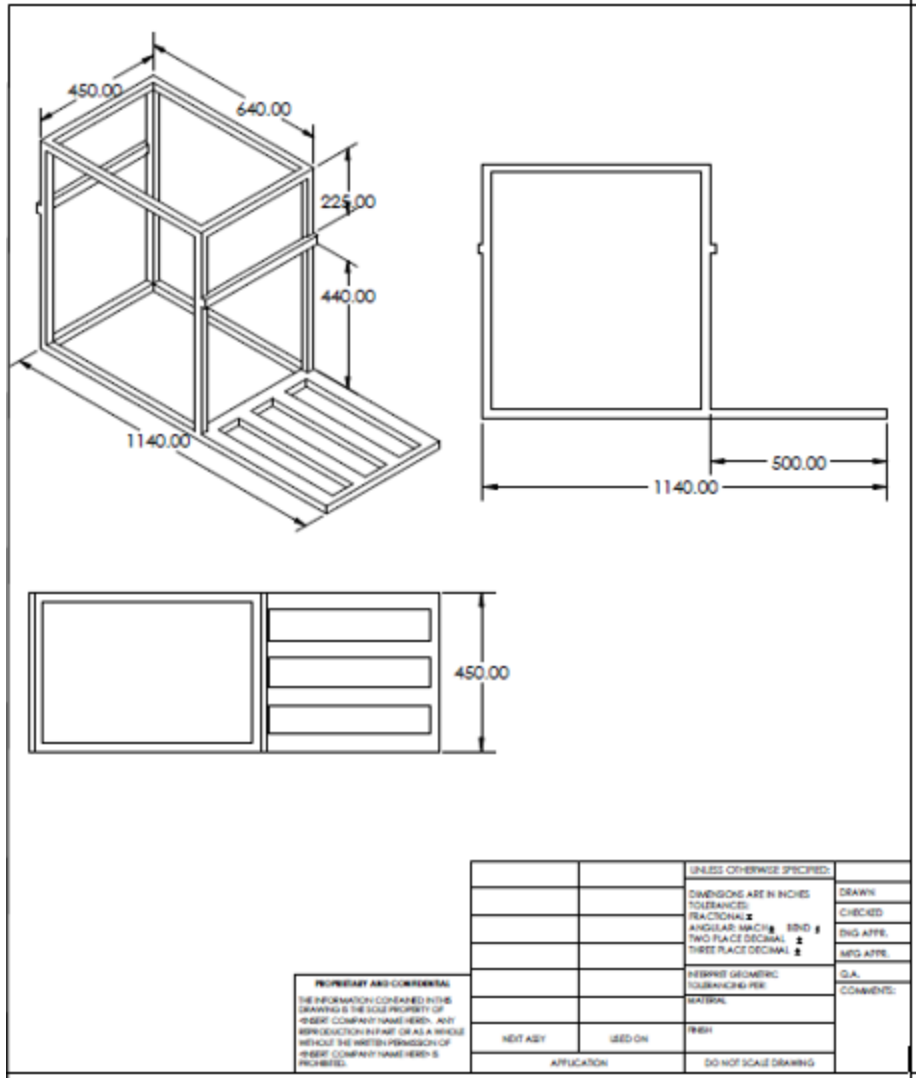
ENGINEERING DRAWING OF THE SHELLING CHAMBER
